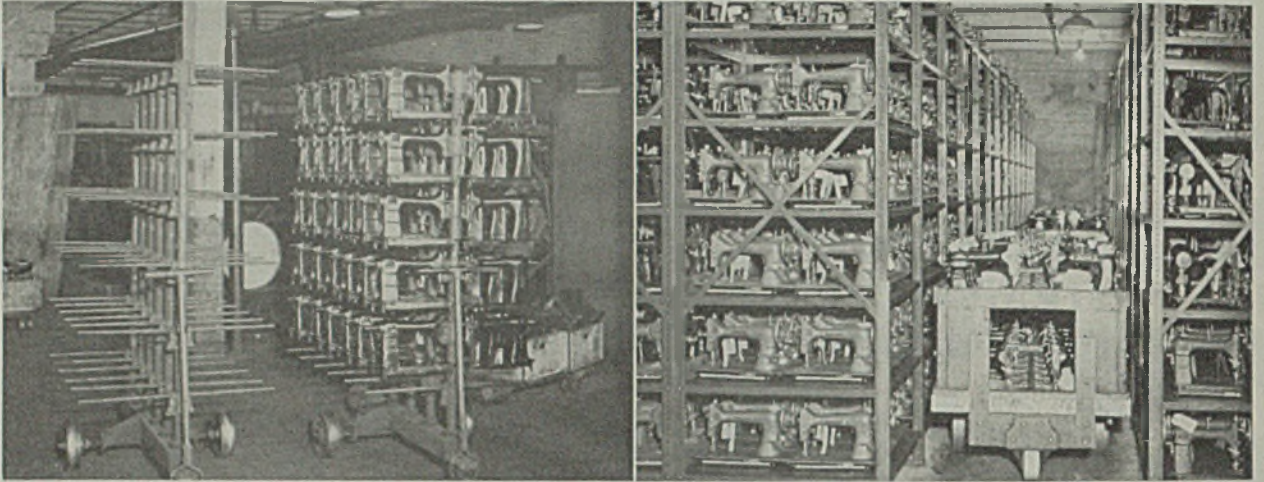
(Left)—Type of 3-wheel all-metal truck used for holding arm and bed plate assemblies during degreasing and enamel baking. Fig. 4. (Right)—Storage racks for assembled machines and the type of truck used to convey the machines from the assembly to the storage department
